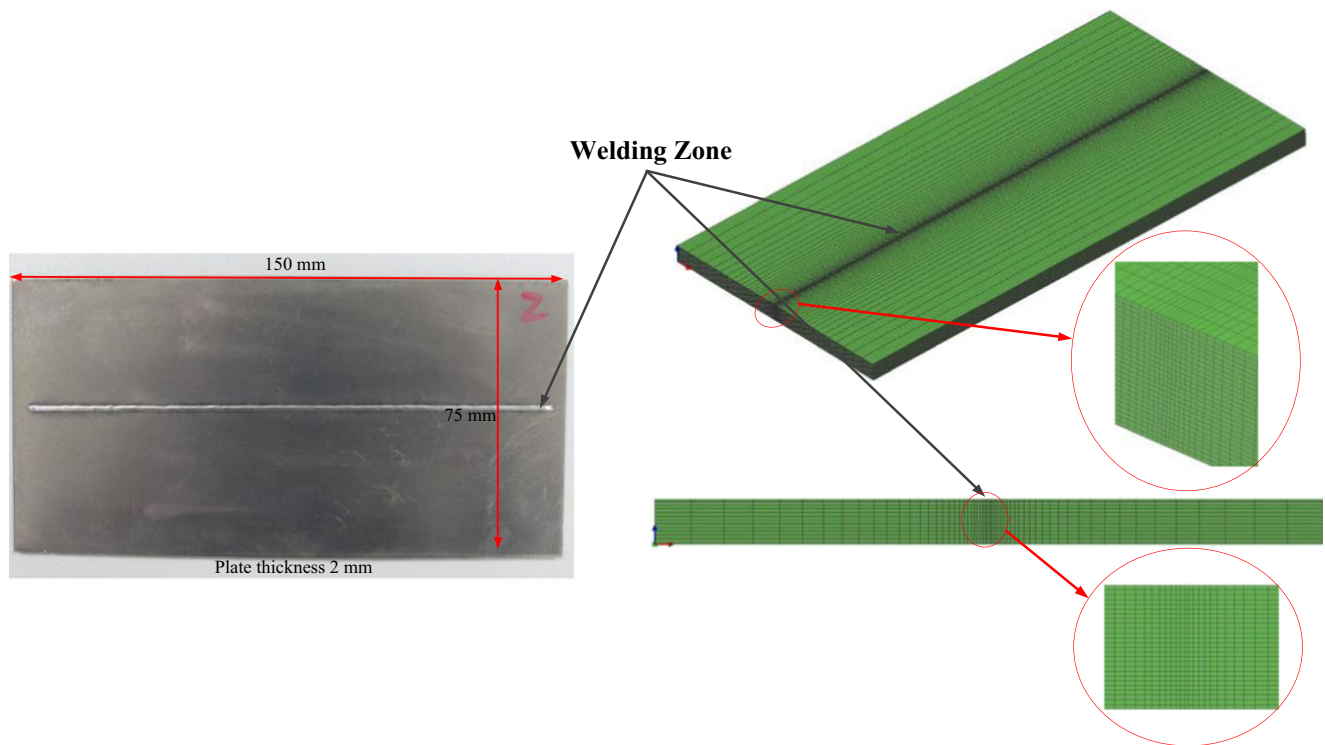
Experimental model (left) and 3D FEA model (right) of fiber laser keyhole welding specimen
